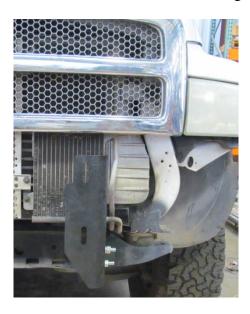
FRONT VIEW OF DRIVER SIDE FRAME MOUNT
